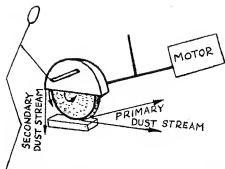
Swing Frame Grinder of "Transverse" design. Grinding a Steel Casting with excessive adherence of Sand.
